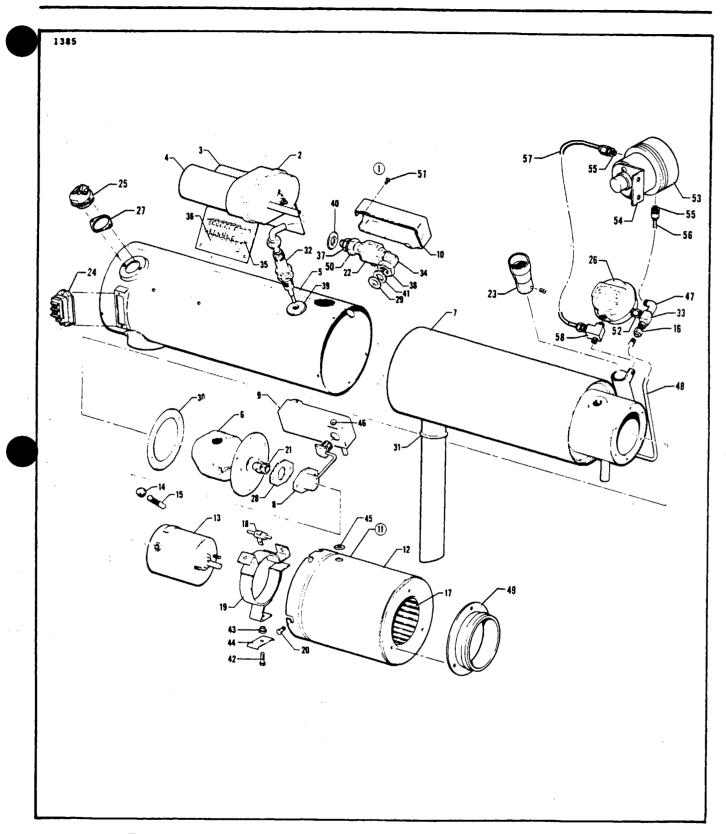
Exploded View of Heater Assembly Part No. 755 257 (28-Volt)
